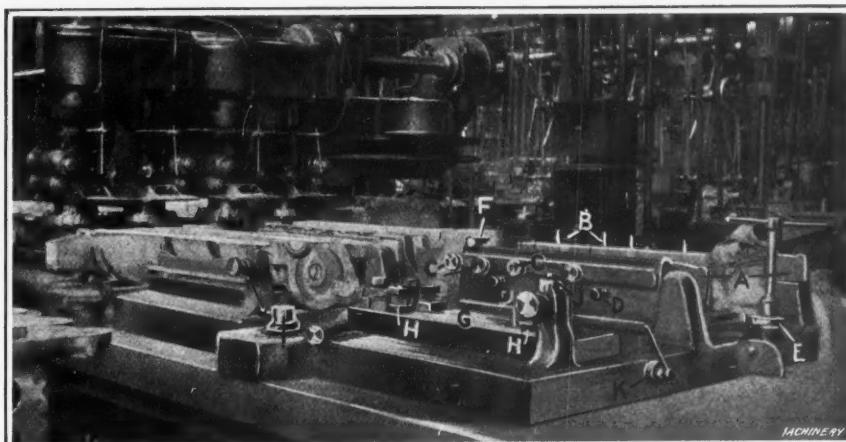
Milling Machine and Fixtures used for taking Finishing Cut over Flanges
